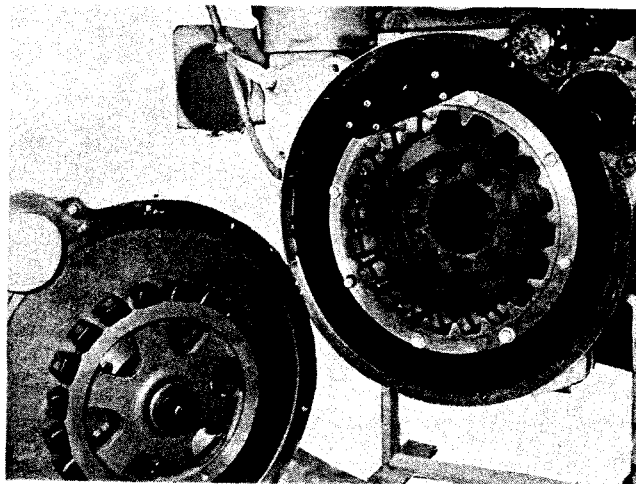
, (V22033). Torquing Twin Disc driving ring
